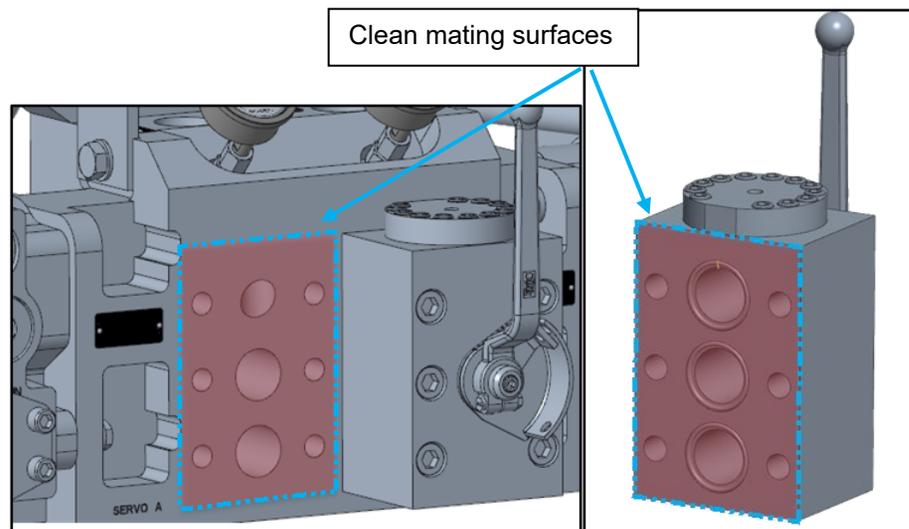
Isolation Valve Mating Surfaces Cleaning
